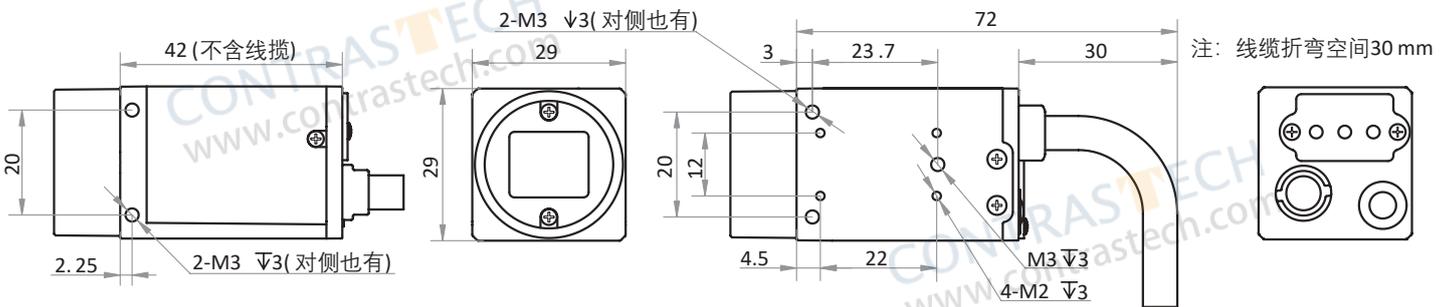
Mechanical Dimensions (in mm) of the C-Mount code reader with 29 * 29 * 42 mm housing(Without Lens).
